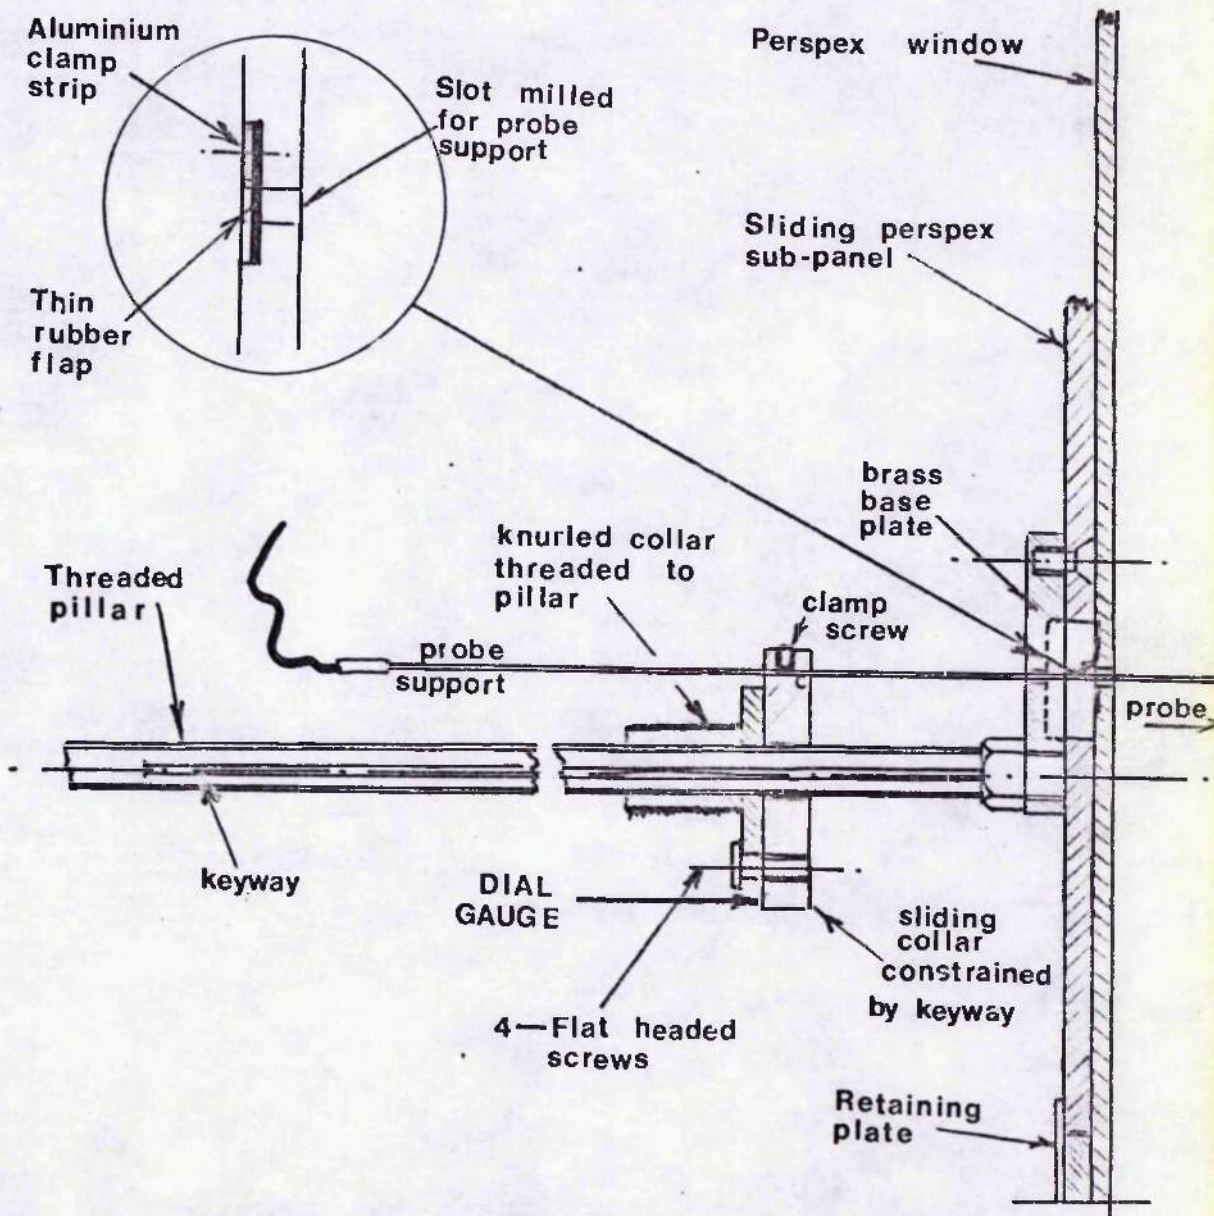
B - SECTION OF TRAVERSING EQUIPMENT
